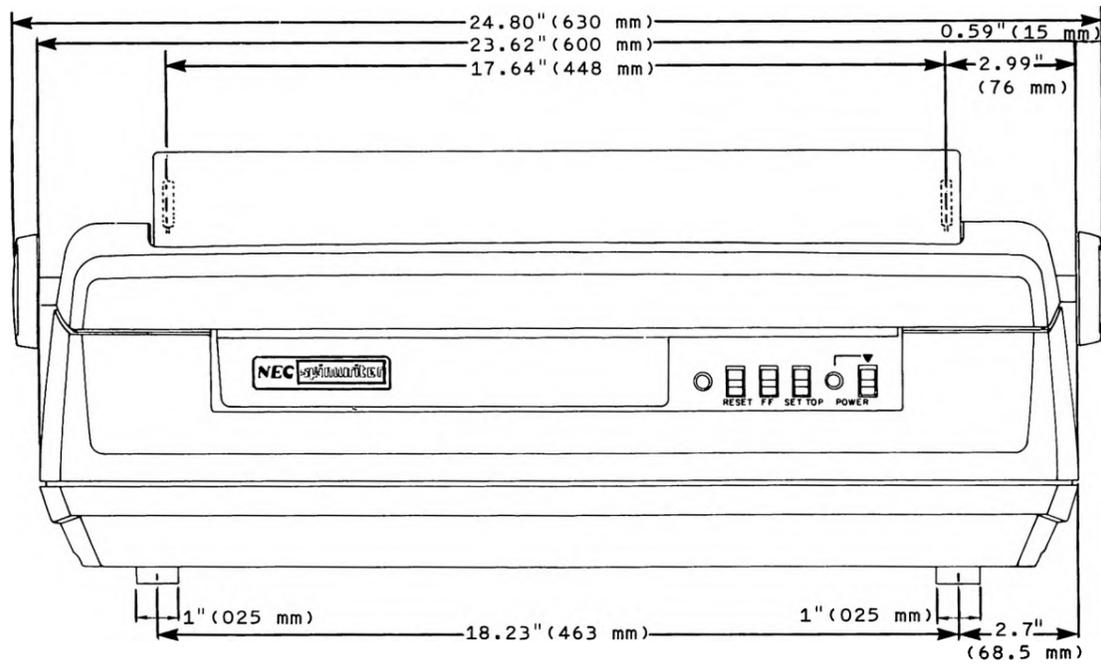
Models 5510 and 5515 SPINWRITER Dimensions, Front View
